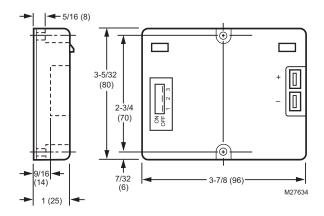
C7660 Selectable Temperature Sensor Dimensions in in. (mm).
